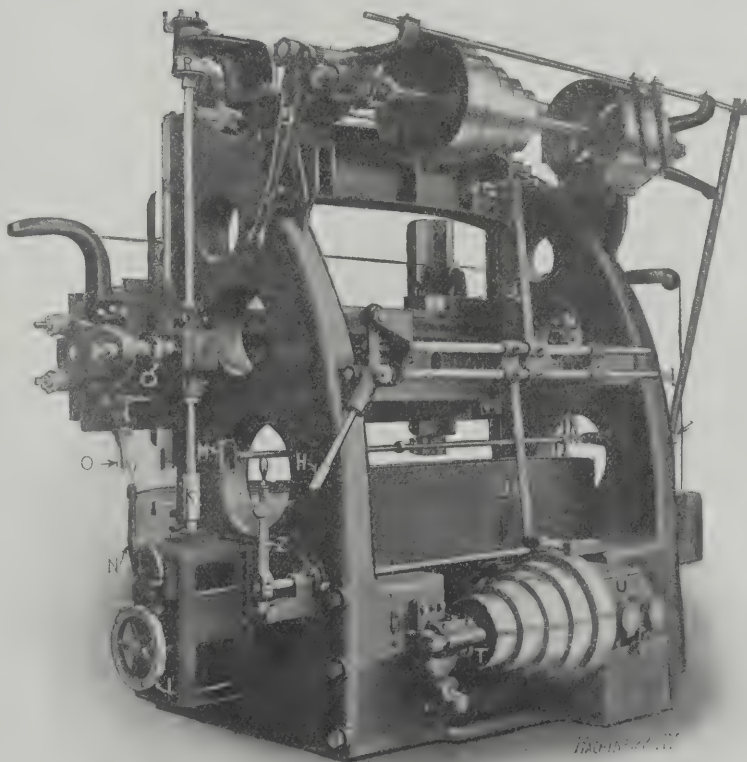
Rear View of "New Model" Boring Mill, showing Main Drive Controlling Handles, Levers, etc.
